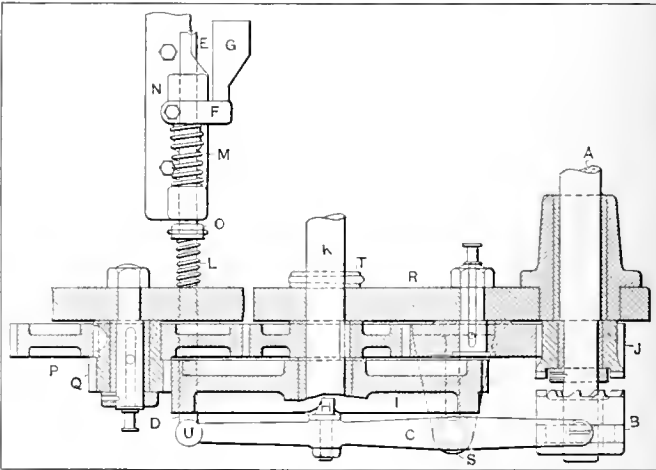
Turret Lathe Indexing Mechanism to be assembled
